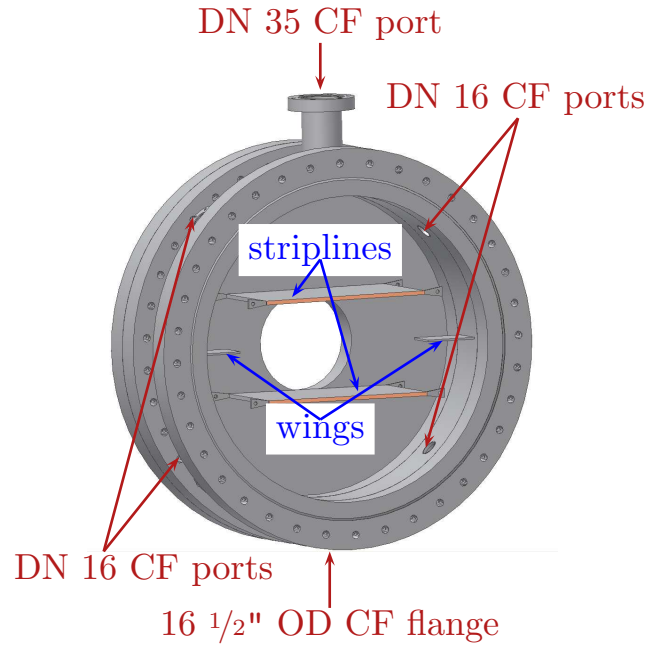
(Color) The final cavity design as done with Autodesk Inventor to obtain a technical drawing. As far as possible, standard vacuum components have been used to implement the strip-line resonator. This ensures the availability of spare parts and accessories such as copper vacuum seals.
